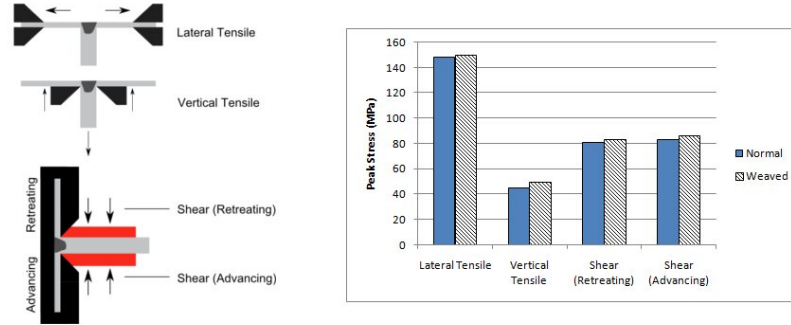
Left: Tensile test fixturing Right: Tensile test results
